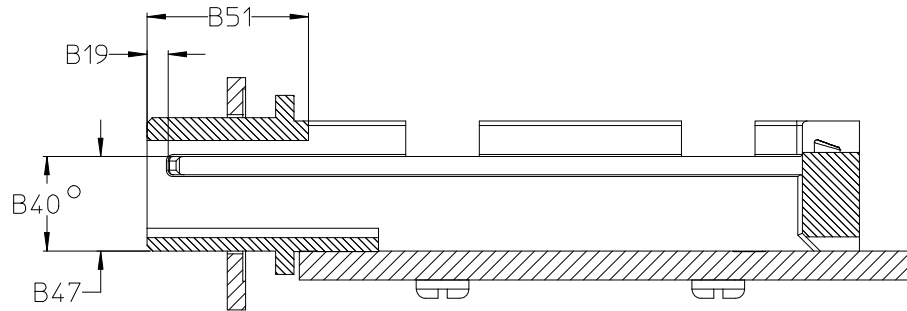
x4 (0°) EMI Guide Housing Assembly Section Side View
